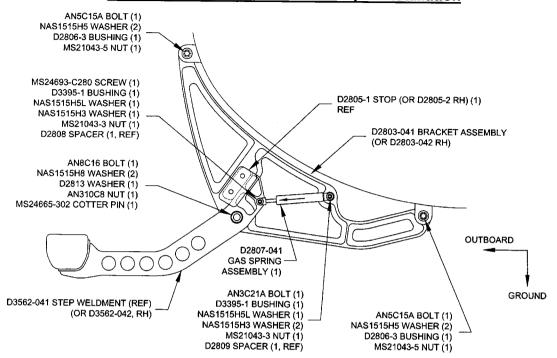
STA 84.29 for D412-630-033/-034 Heli-Access-Step™ Installation (View rotated 90° CW)
